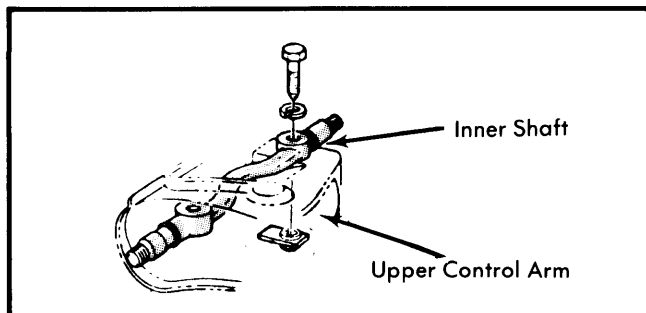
Exploded View of Upper Control Arm Inner Shaft
